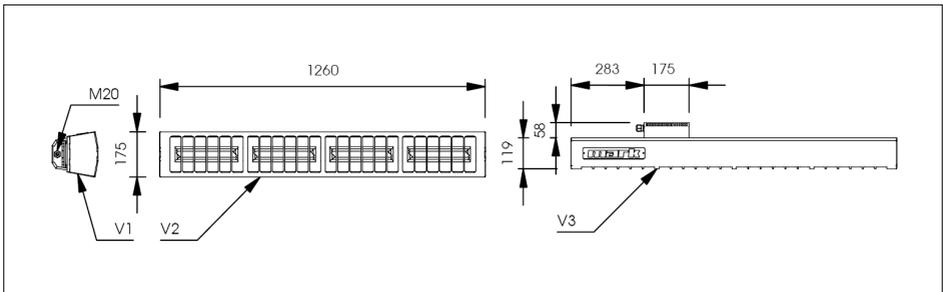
Dimensions of the INFRA ER 3200L. (V1: Left side view, V2: Bottom view, V3: Front view)
